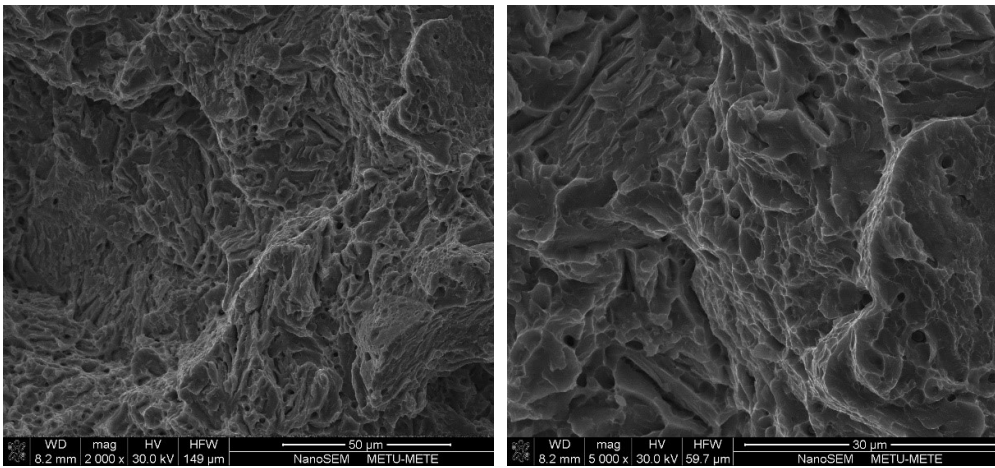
Fracture surface of 420C-24h tensile test specimen
